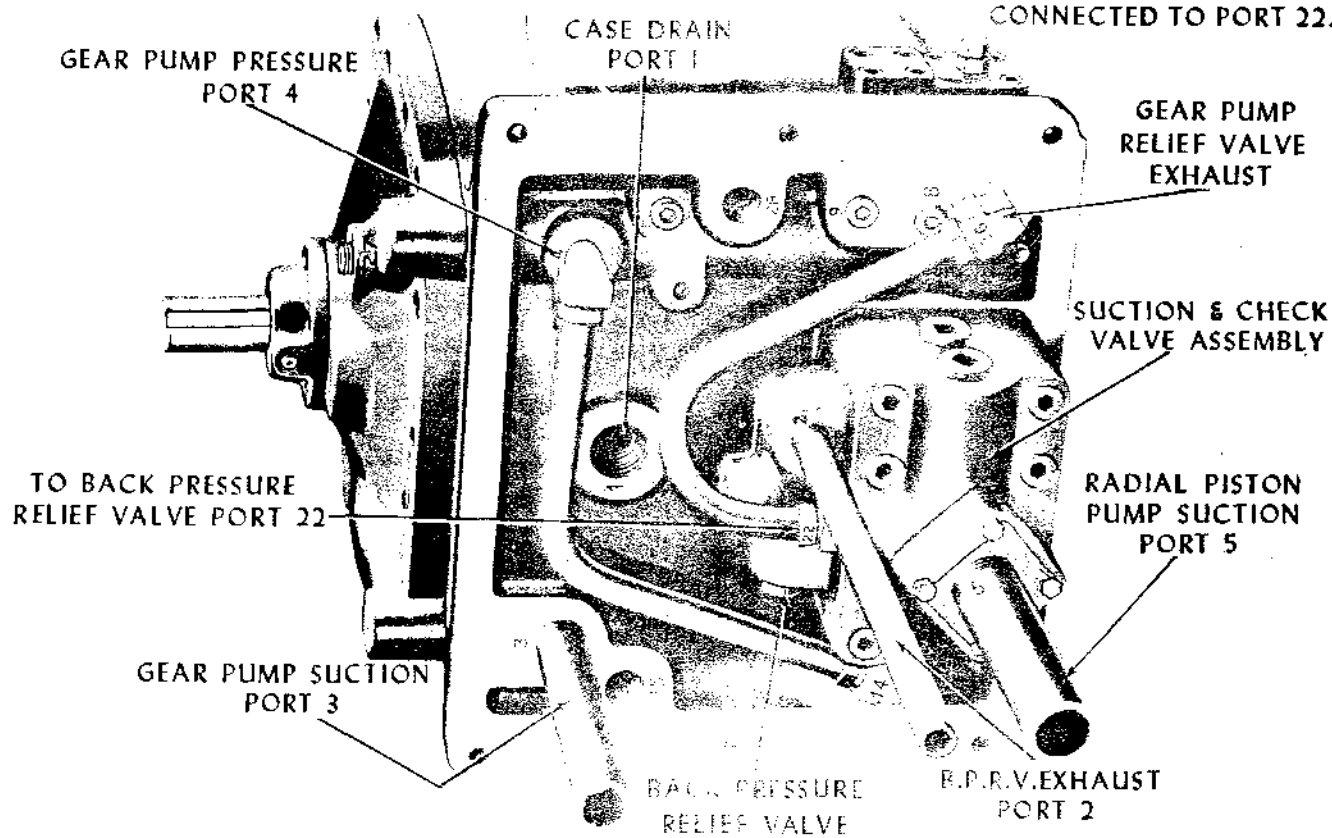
TYPE "DV" PUMP, BOTTOM VIEW.
